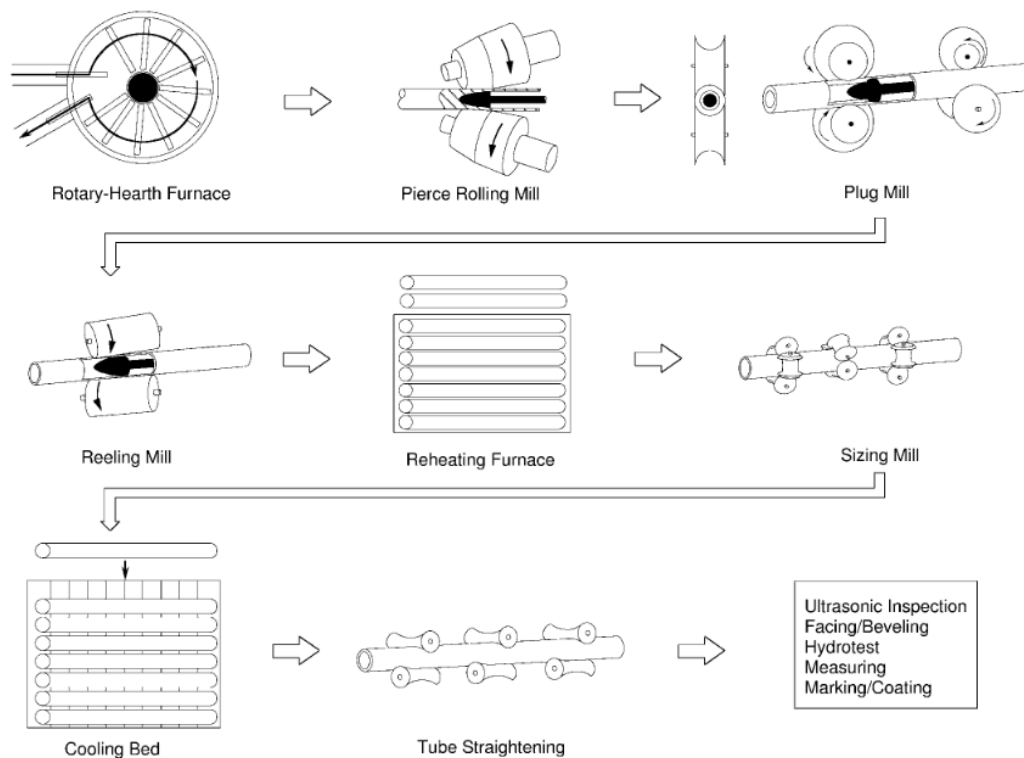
Steps involved in seamless tube manufacturing method by Plug Rolling Process.
